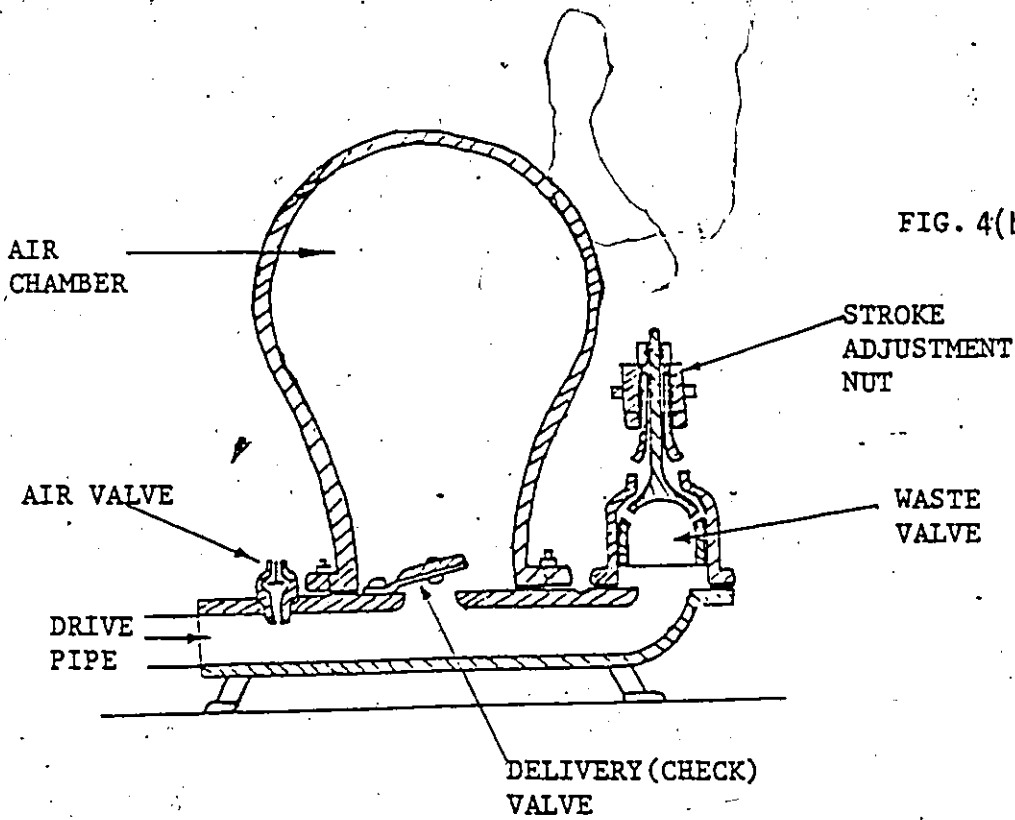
(b) DETAILS OF THE WASTE AND CHECK VALVES
